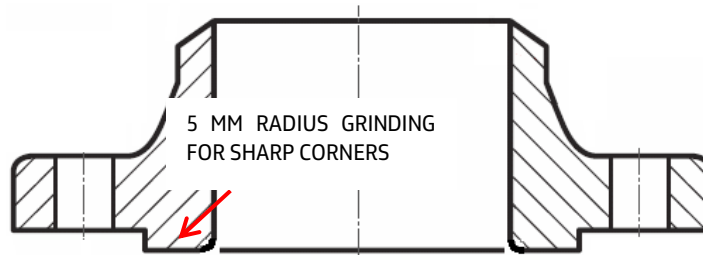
Flange sharp corners shall be ground to 5 mm minimum radius.
